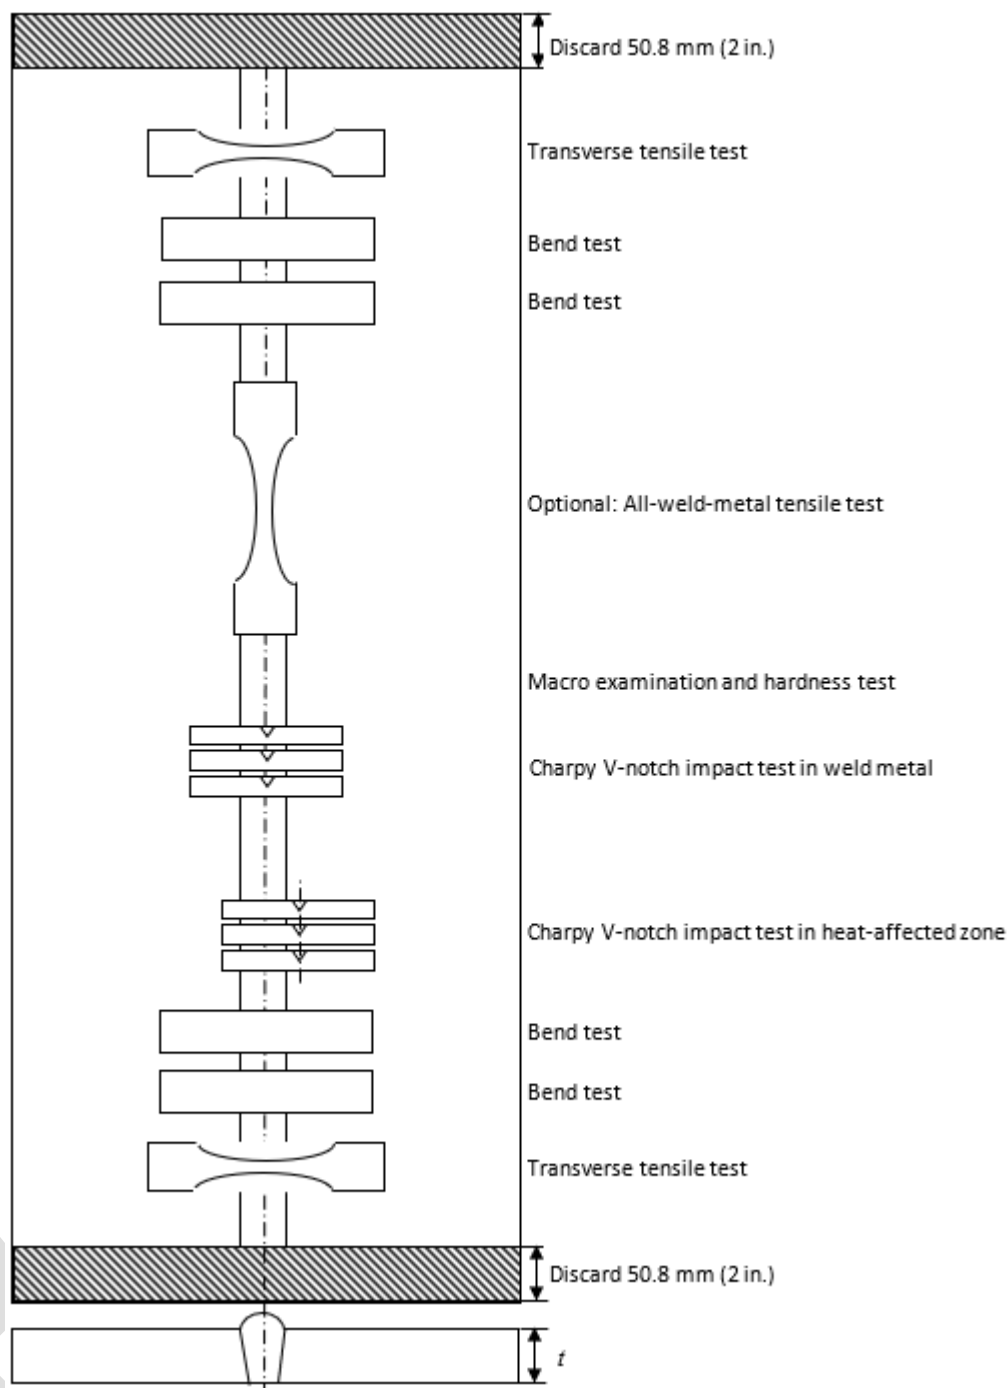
Typical Mechanical Specimen Removal for Welding Procedure Qualification
